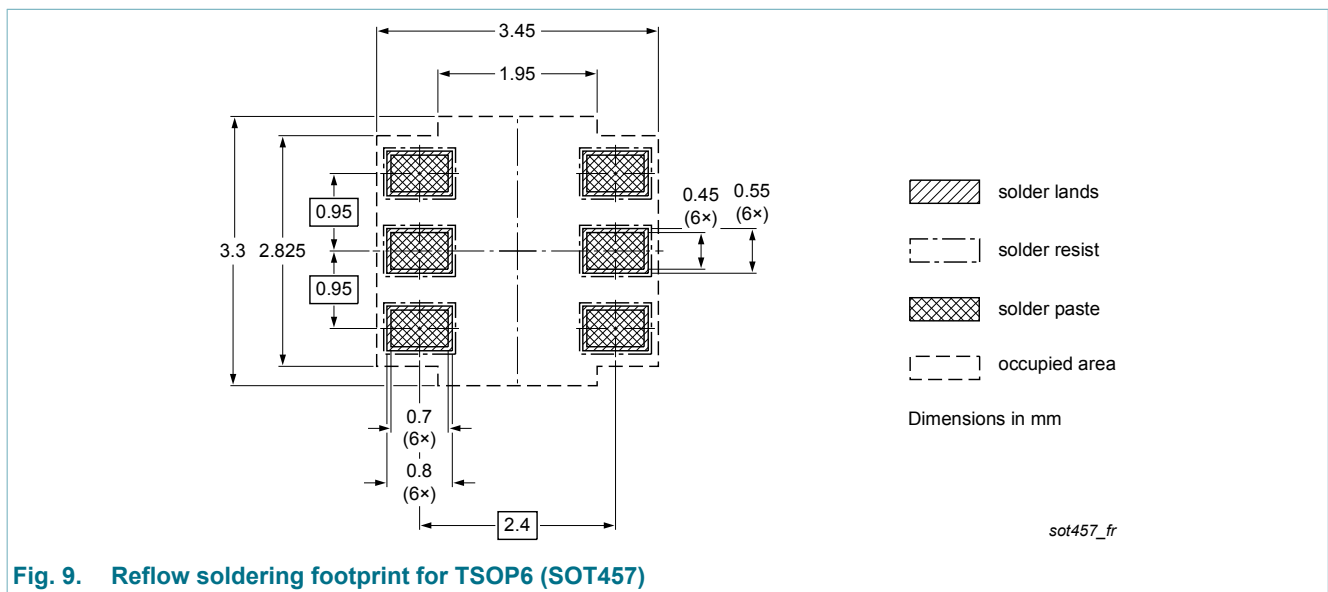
Reflow soldering footprint for TSOP6 (SOT457)
